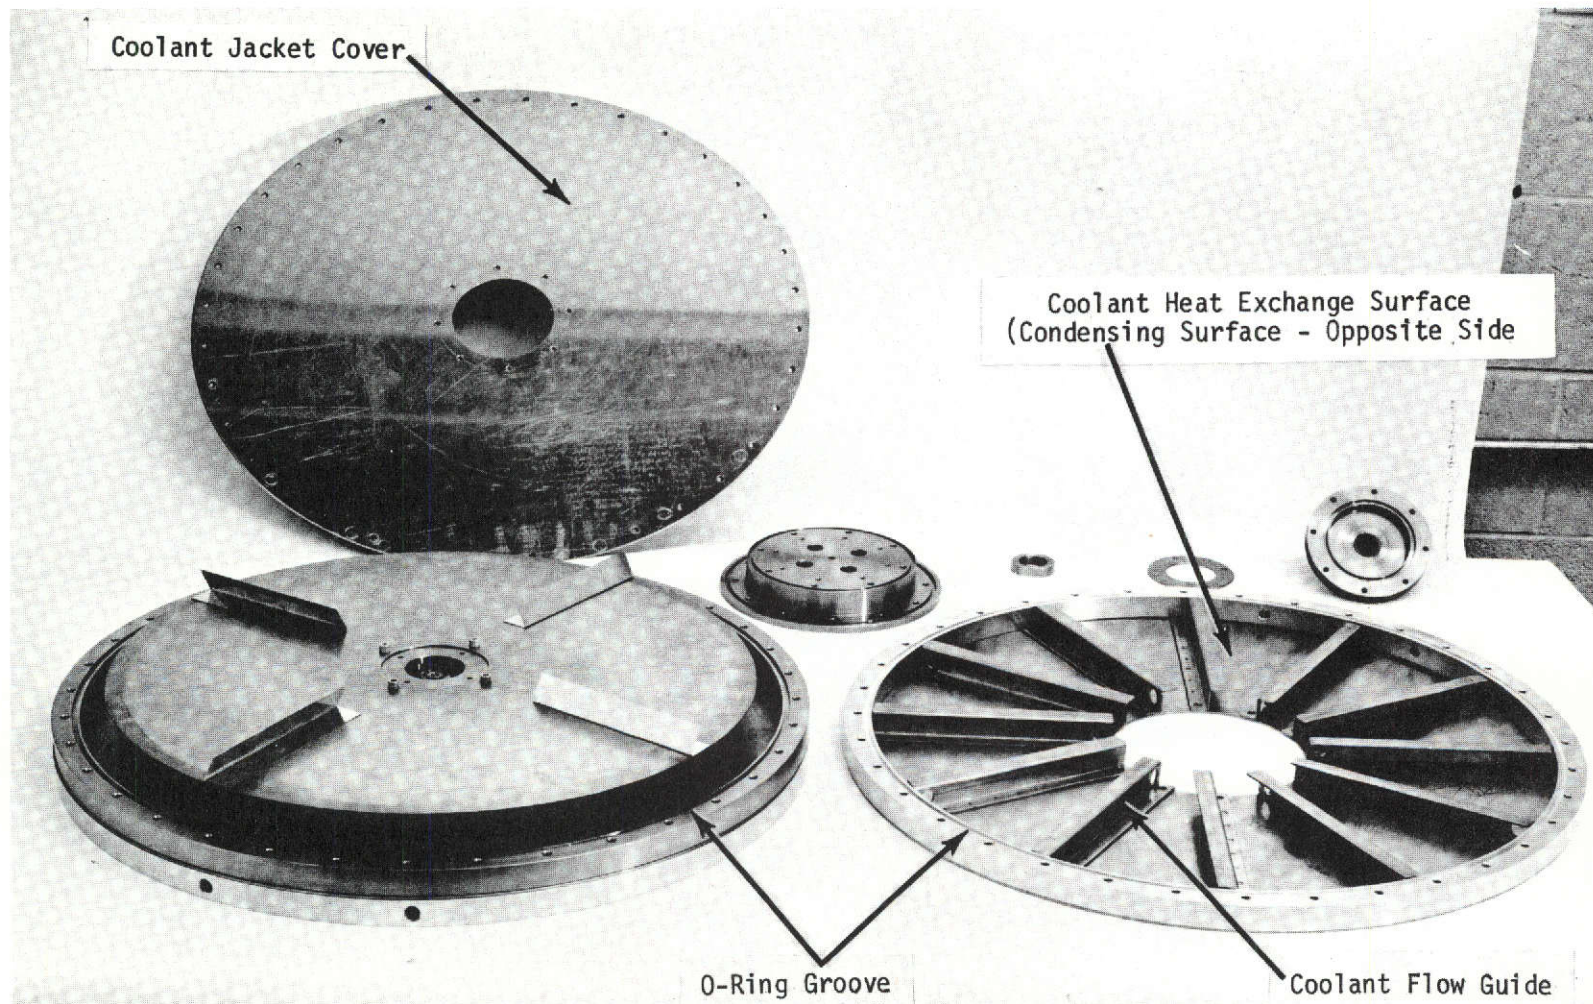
CONDENSER WITH COOLANT JACKET REMOVED
